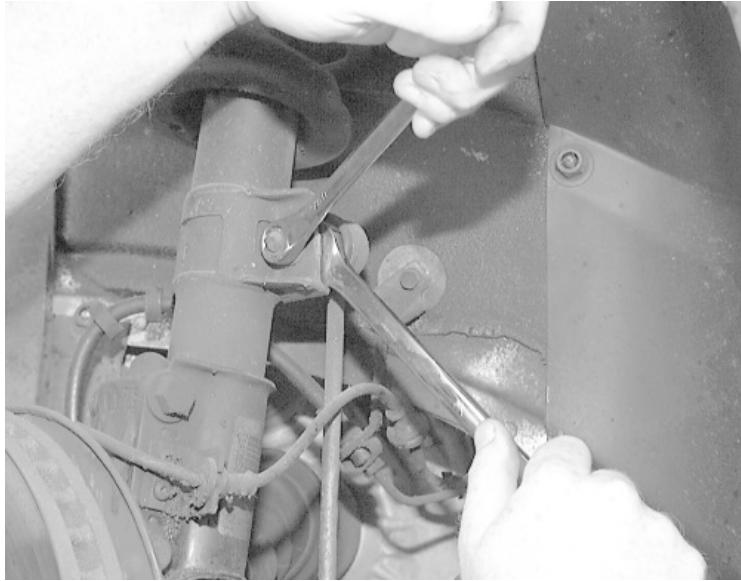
Hold the hex head on the ball end of the link with an appropriate size wrench, or the nut cannot be removed
